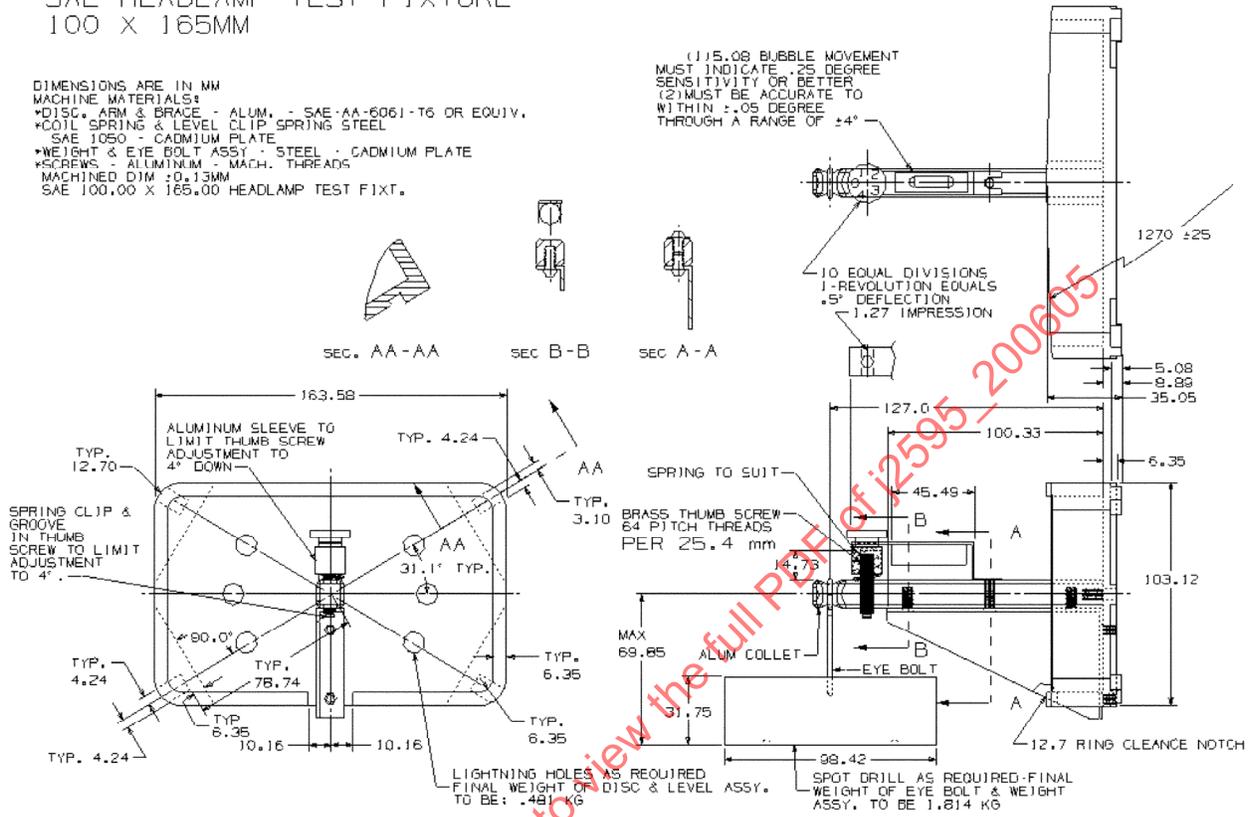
DEFLECTOMETER (100 x 165 mm)
